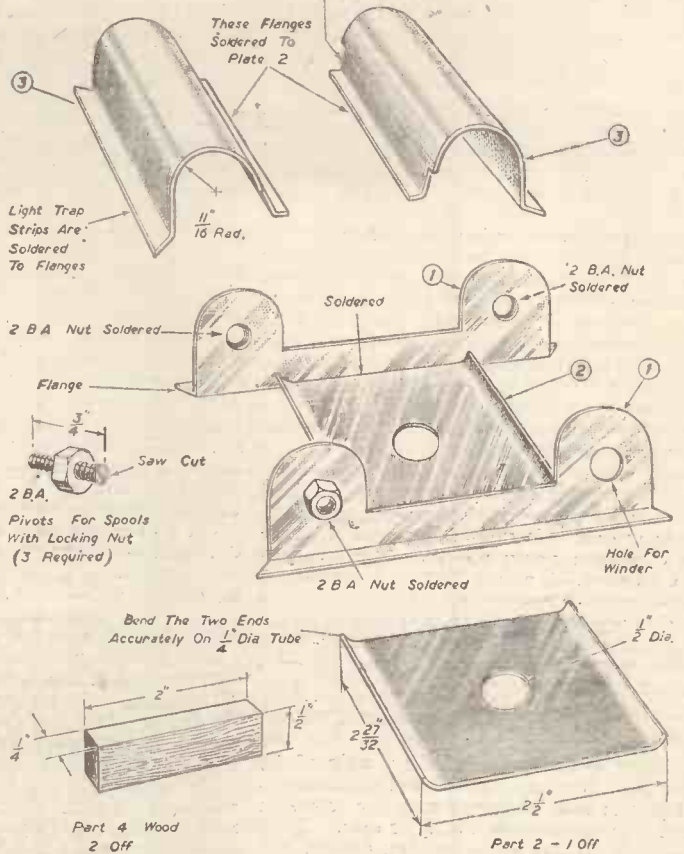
Showing how the various parts are bent to shape and assembled.
